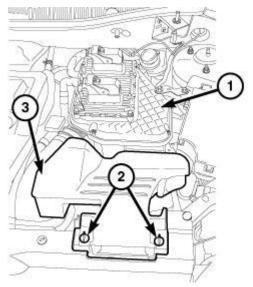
Retainers, Fresh Air Inlet Duct & Air Cleaner Body Courtesy of CHRYSLER GROUP, LLC
